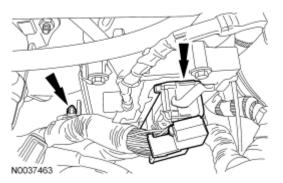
Locating Powertrain Control Module (PCM) Electrical Connector And Pin-Type Retainer Courtesy of FORD MOTOR CO.
